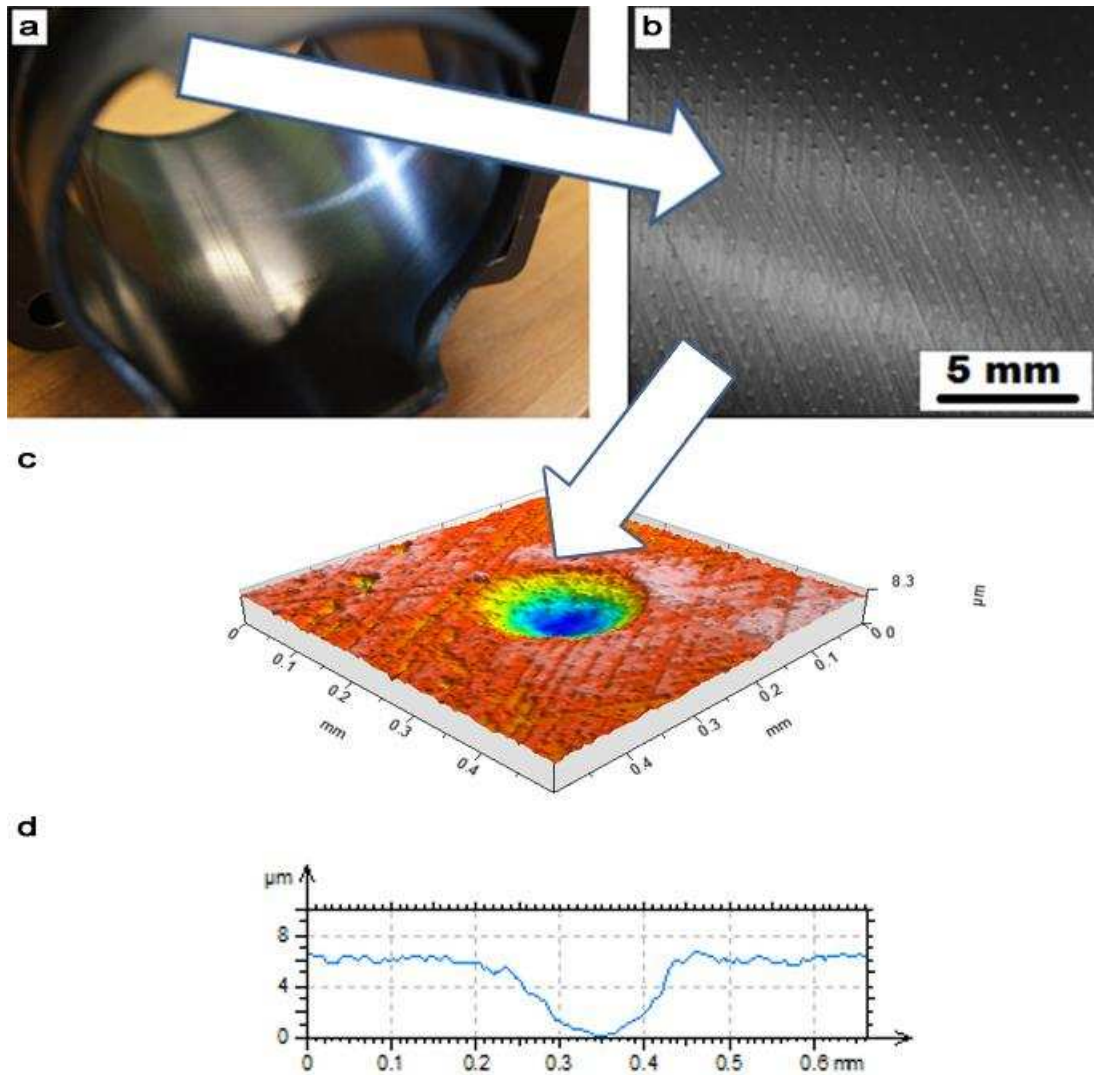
Textured cylinder: a) view of the cylinder; b) surface morphology; c) 3D representation of a single dimple; d) cross-section of a single dimple
